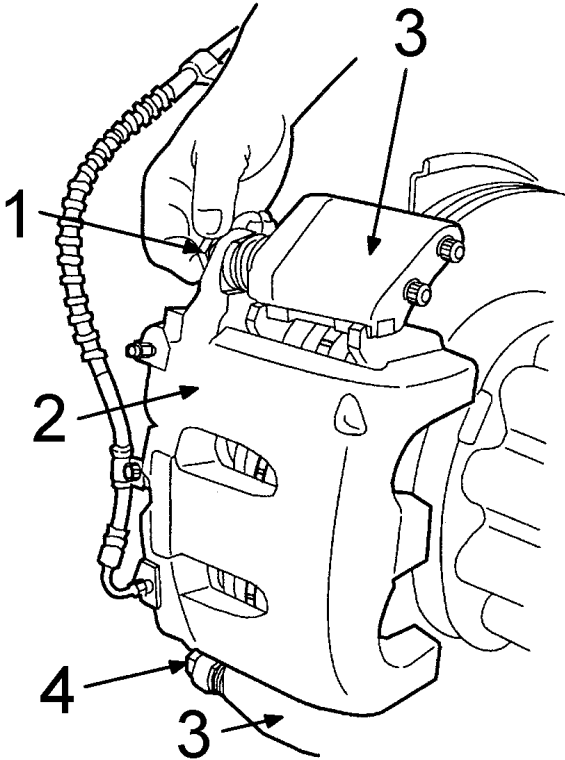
Remove Upper Hex Mounting Bolt to Lower Caliper to Replace Disc Brake Pads
